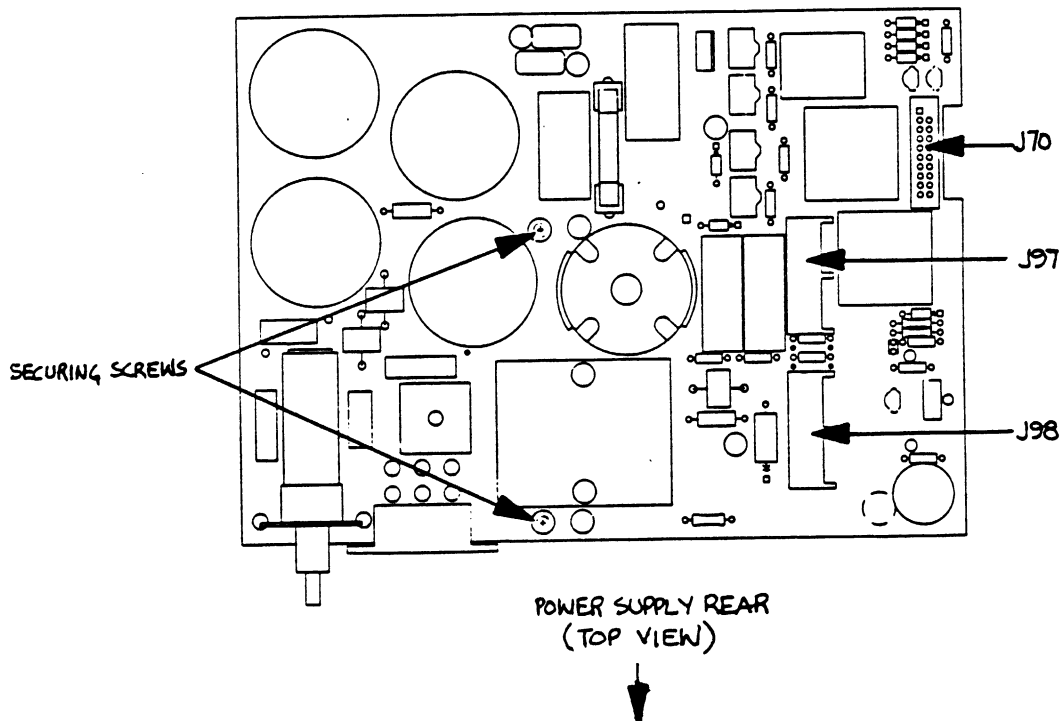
Connector locations for removal of the A2 Line Inverter Board.
